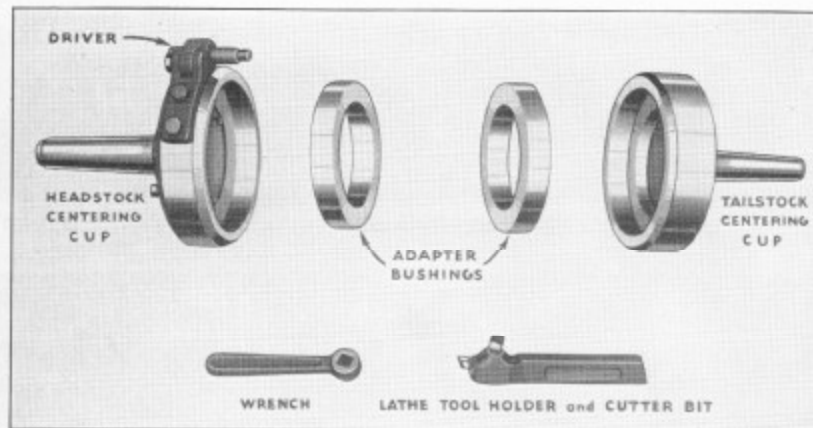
Differential servicing equipment for 9-inch South Bend Lathe.
